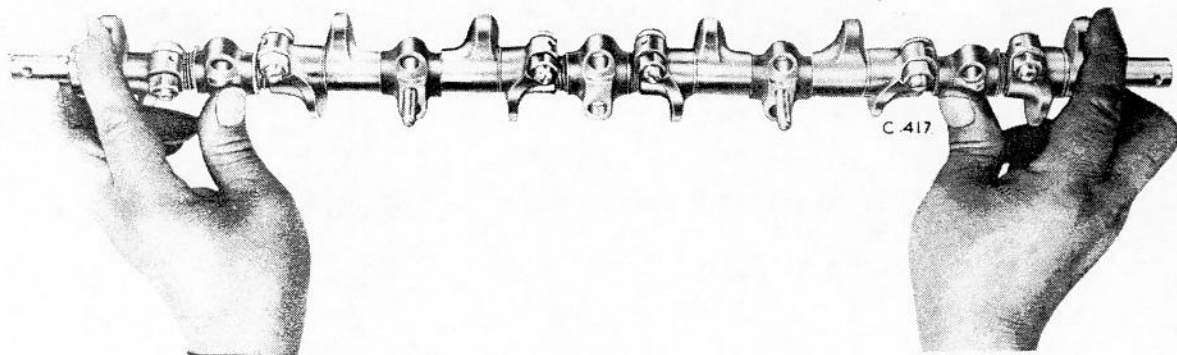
Fitting inlet rocker spindle assembly (Stage 3)
